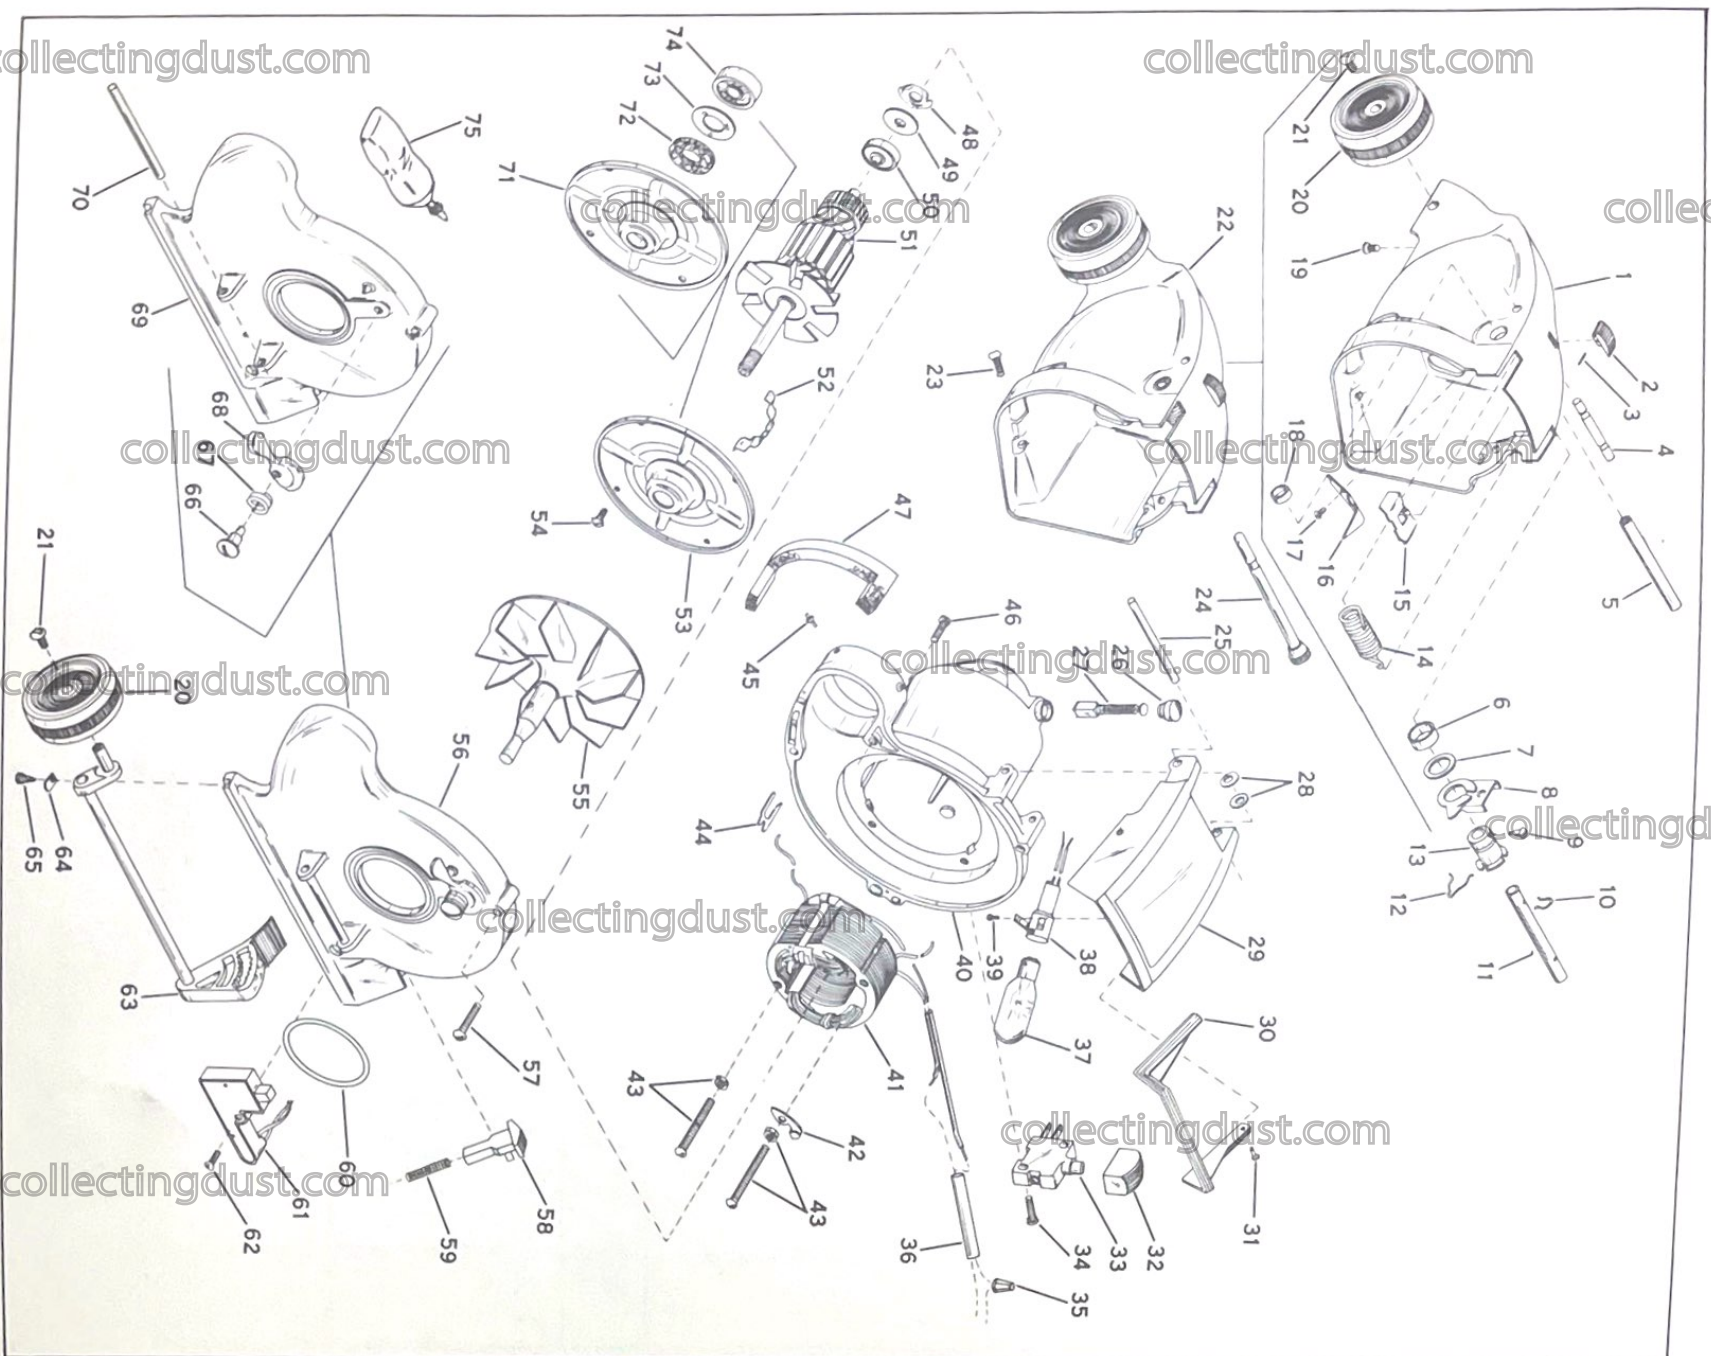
Motor group, exploded view. (Model 516 through 518)
